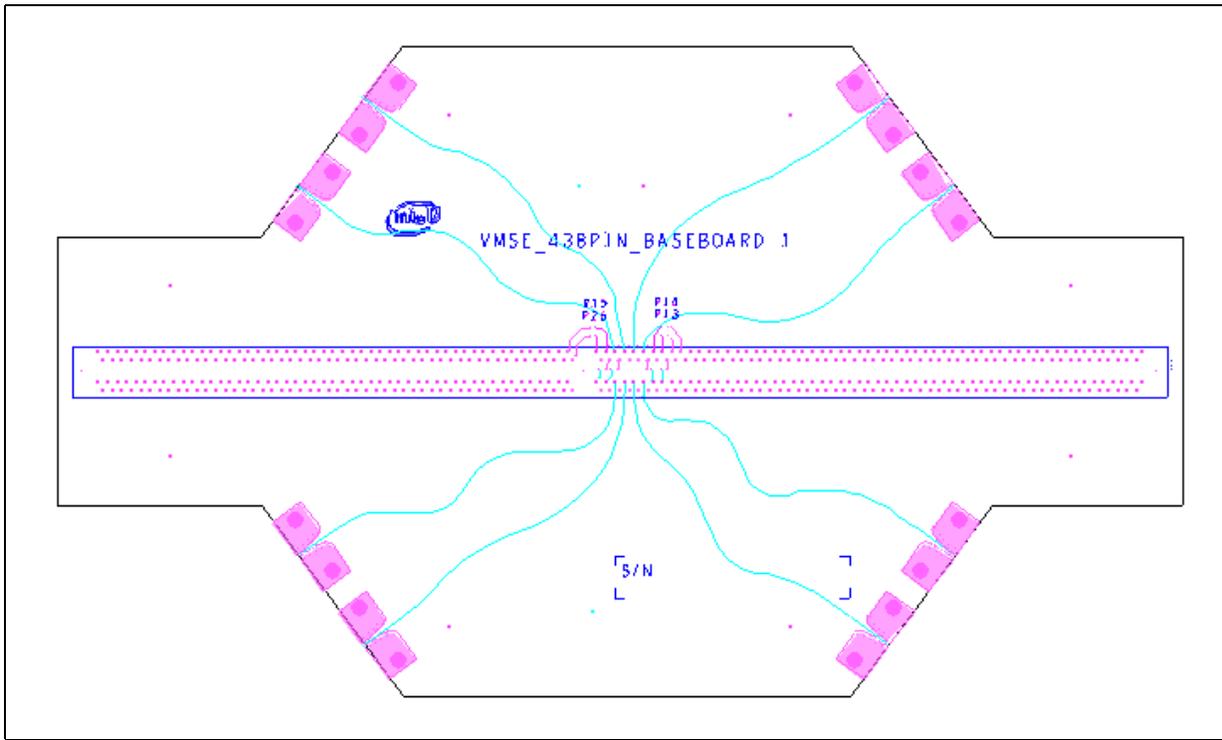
and Figure C-3 illustrate the footprint of the baseboard and riser card test boards used in taking electrical measurements.
